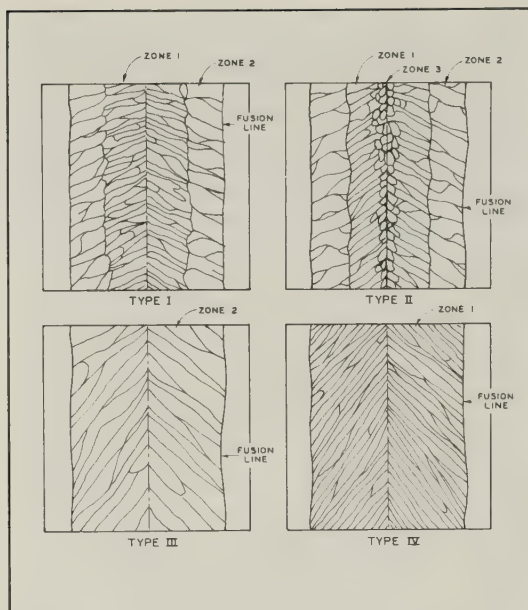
Sketch of electroslag joint types, longitudinal section through the weld.
